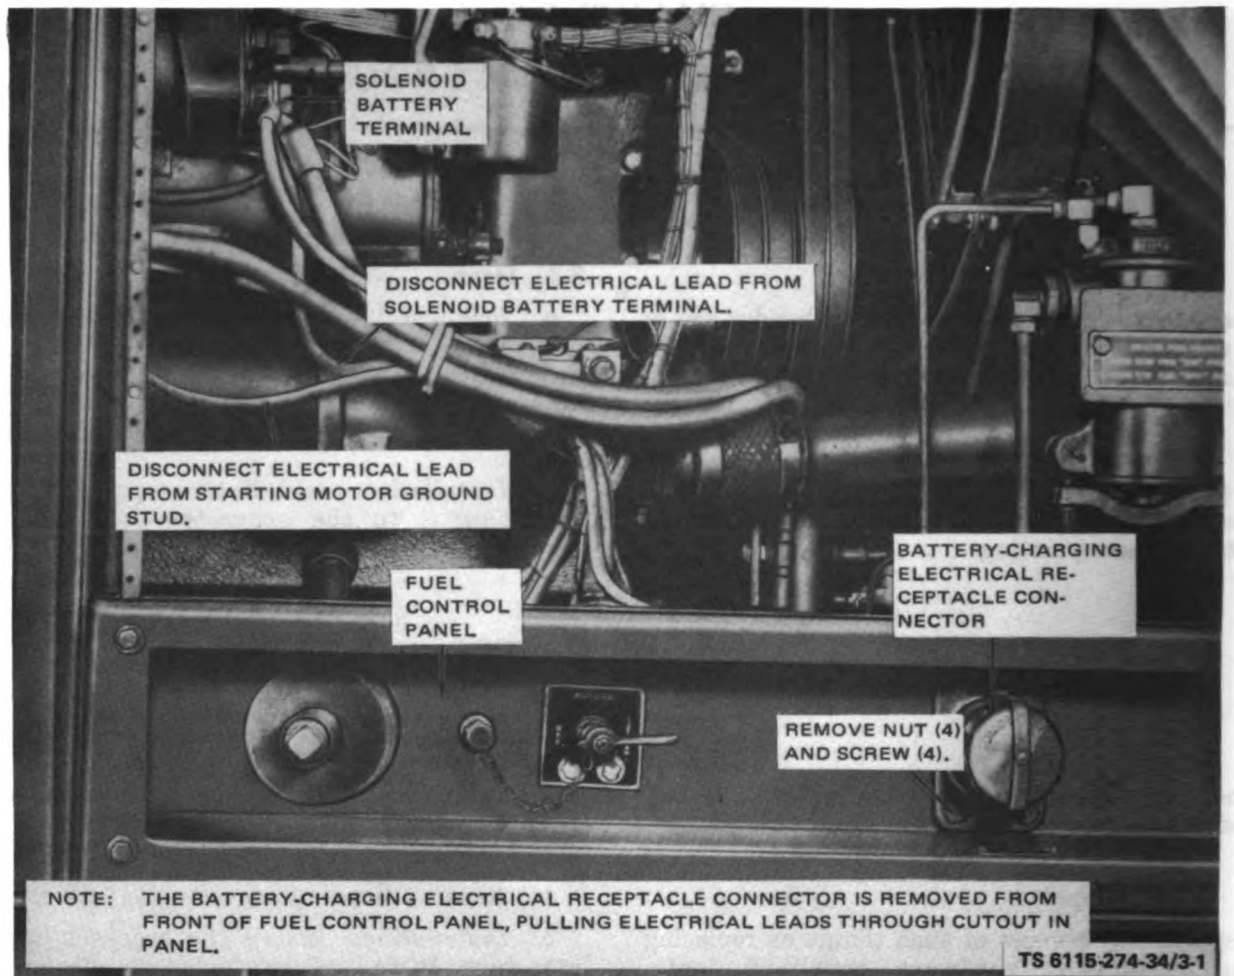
Battery-Charging Electrical Connector, Removal and Installation Receptacle
